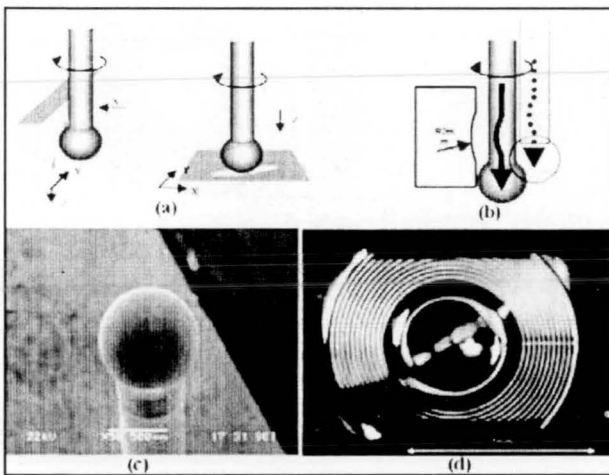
Example of Freeform Micromachining Using on-machine Fabricated PCD Ballend Tool
